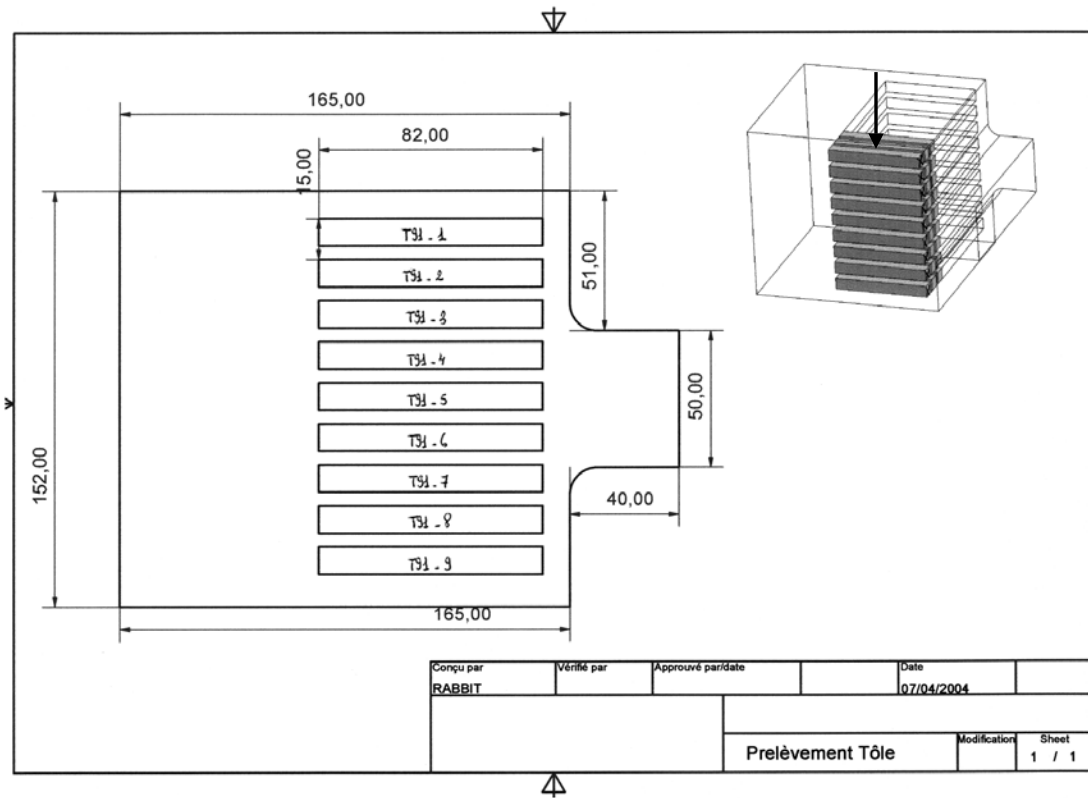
Location of creep test specimens in the sheet made of T91 steel (1)
